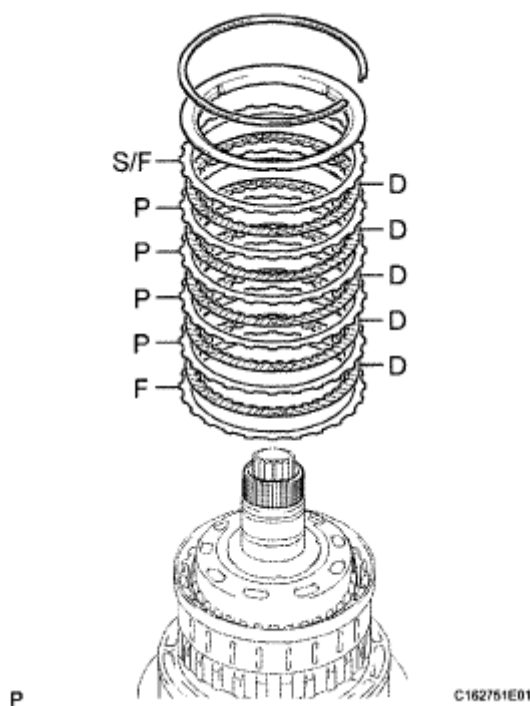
Identifying Flange, Discs, Plates, Selected Flange And Reverse Clutch Reaction Sleeve To Clutch Drum
